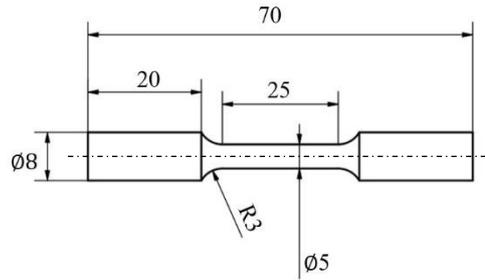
Engineering drawing of the specimen used in tensile tests (units in mm)
